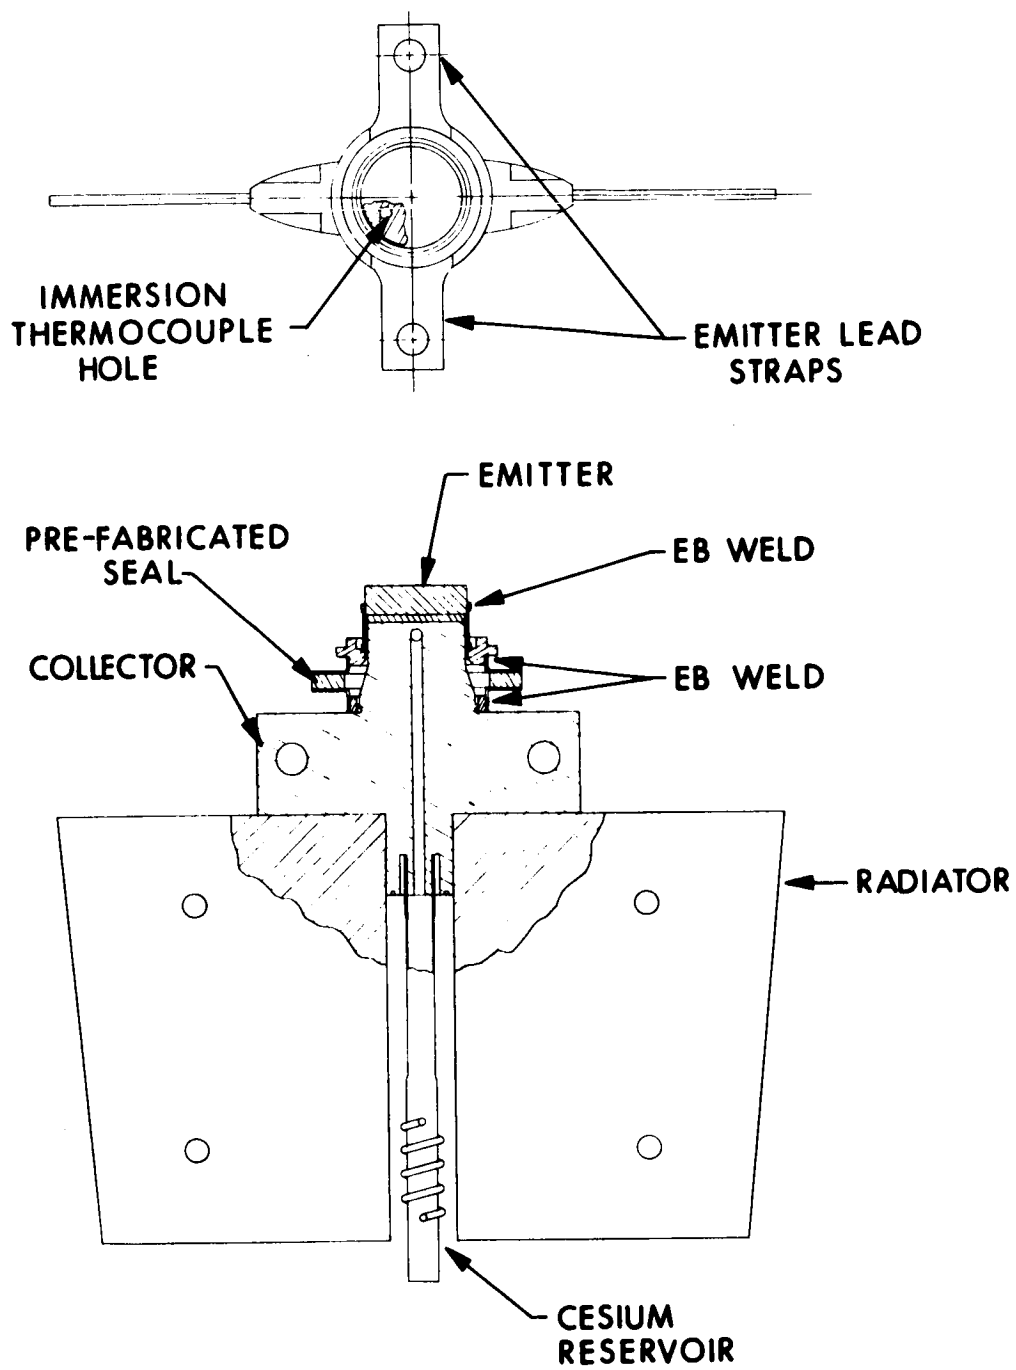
COMPLETED DIODE ASSEMBLY
